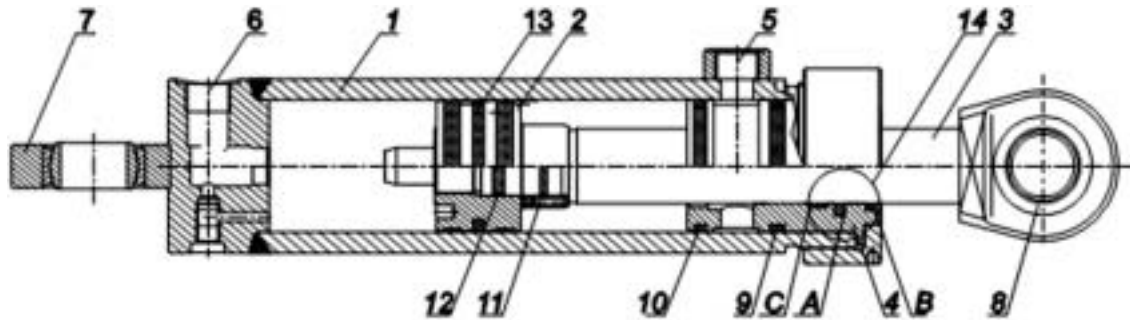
Hydraulic cylinder: 1 – Cylinder, 2 – Piston, 3 – Piston rod, 4 – Gland, 5, 6 – Channels, 7, 8 – Ears, 9, 10 – Piston rod gland static seal, 11, 12 – Piston static seal, 13 – Piston dynamic seal, 14 – Piston rod dynamic seal, A – Sealing ring, B – Wiper, C – Bearing
